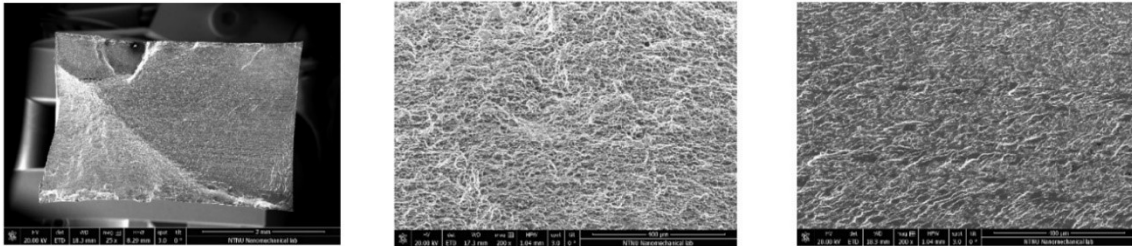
Fractography of a selected specimen after breaking under cyclic load in the fatigue test. The specimen is one of the parent material.
